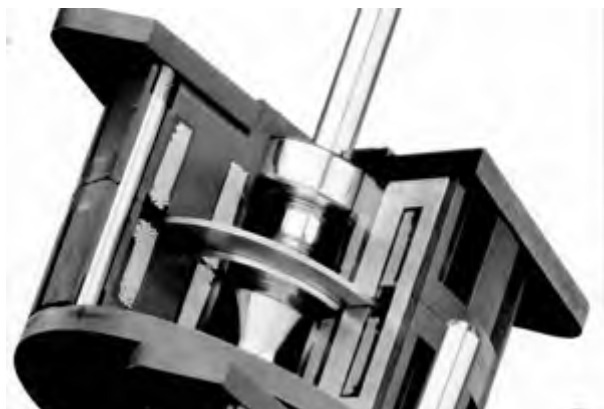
A disk rotor stepping motor with ironless rotor for low inertia and inductance. Courtesy: Escap Motors.
